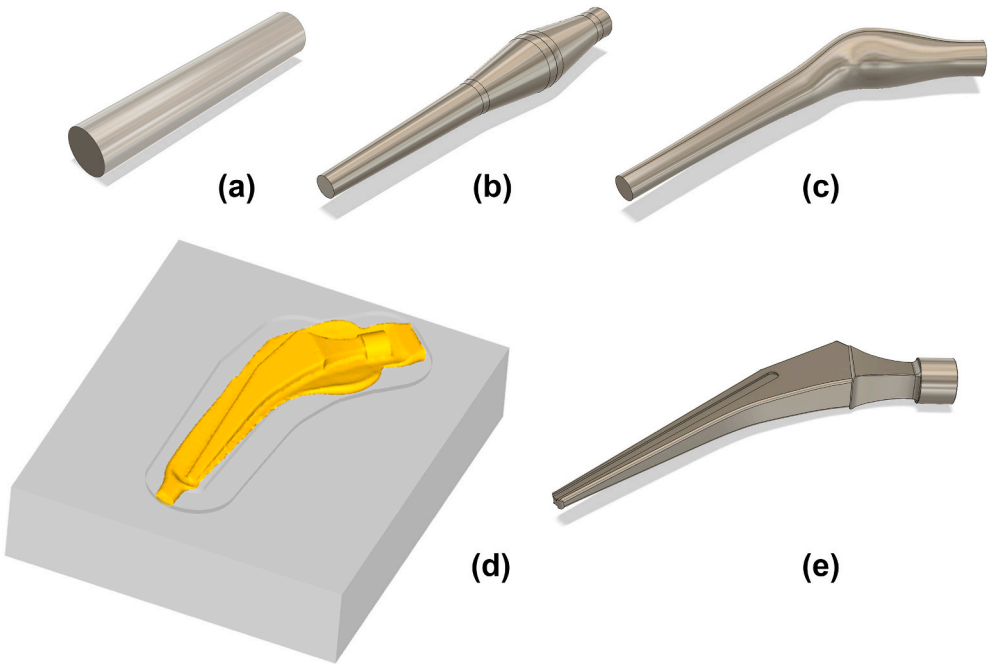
The shaped profiles at each stage of hip joint forging and shaping route. Initial feedstock bar (a), local cross section reduction in stem region (b), femoral neck-shaft angle (NSA) (c), closed-die forging stage (d) and workpiece after machining in its pre-coating stage (e). The reference axes are shown at the bottom right.
